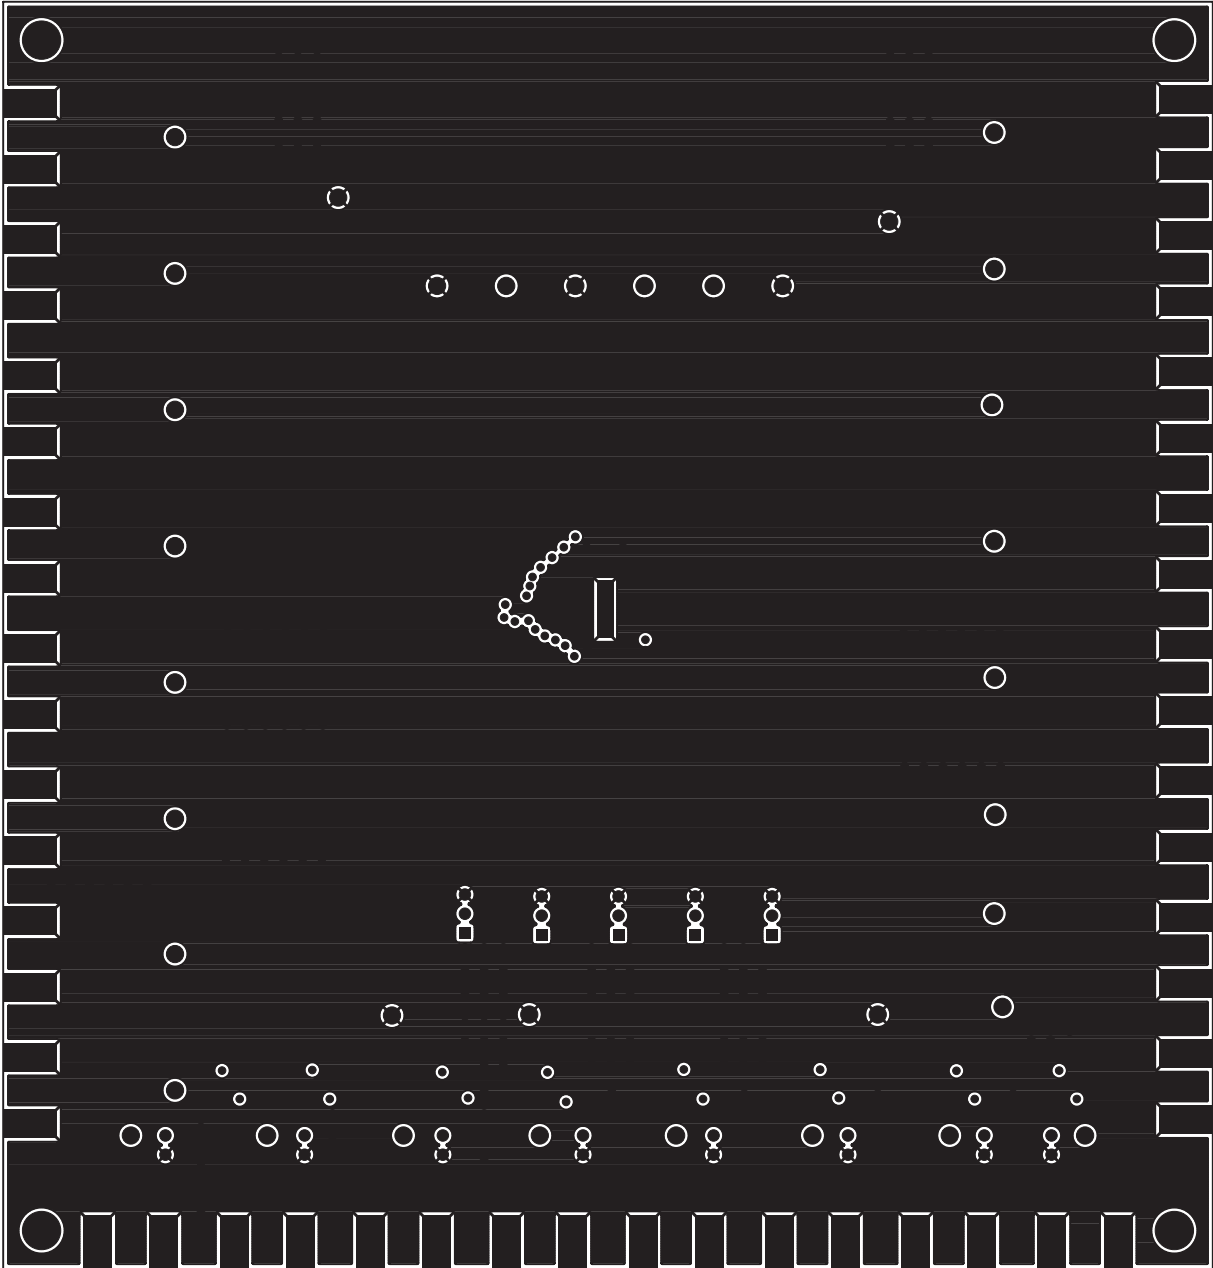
MAX4936A EV Kit PCB Layout—Layer 2 (GND)
